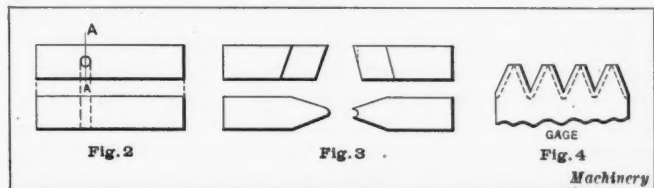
Blank for Female Radius Tool. Fig. 3. Male and Female Radius Tools. Fig. 4. Thread of Rough-threaded Gage
